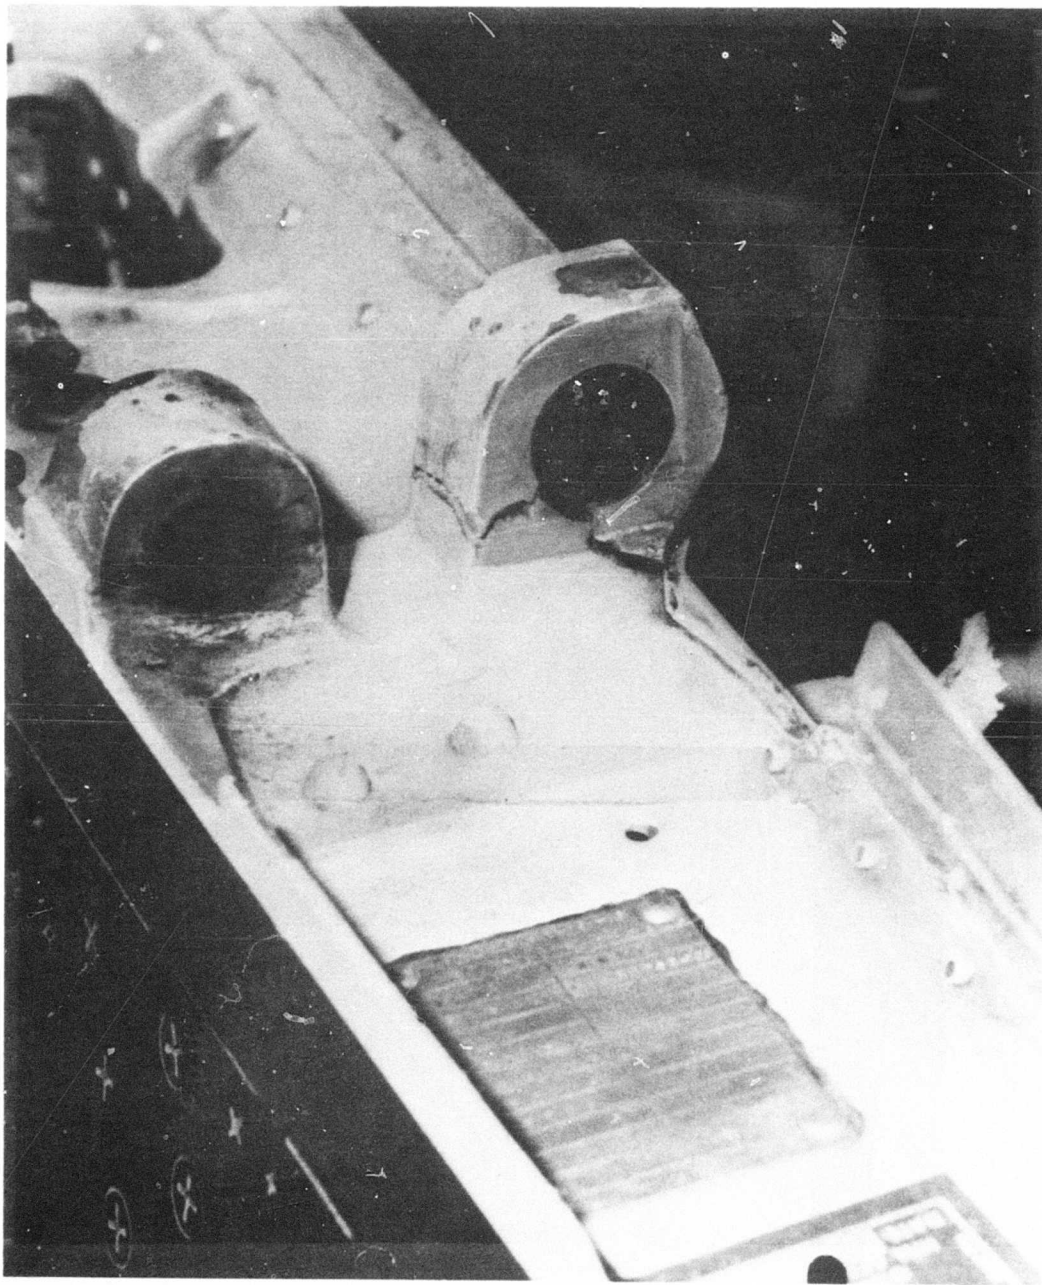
Failure of Wingtip Fold Rib Lower Aft Locking Lug
